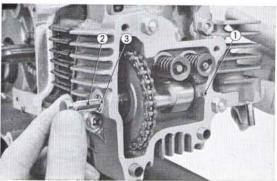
① 3×12 dowel pin ③ Cameshaft center pin ② Bolt
